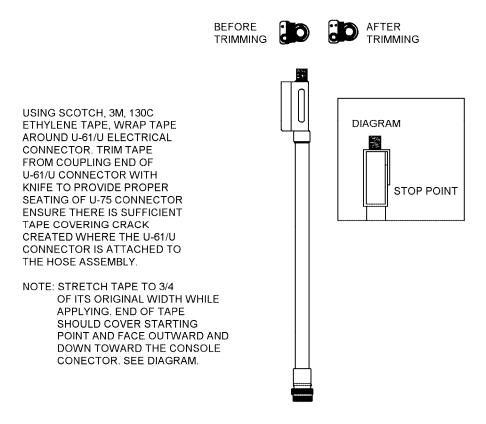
Unmodified Regulator to Seat Kit Hose Assembly Taping
